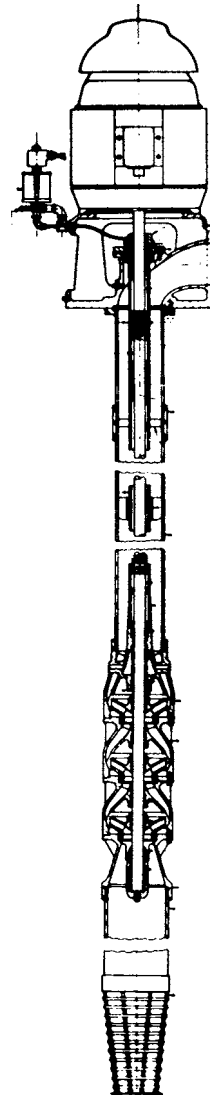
Vertical turbine multistage pump with closed impellers and oil-lubricated enclosed line shaft.
